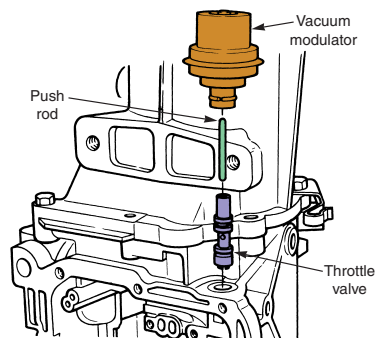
The vacuum modulator and throttle valve can be removed now to prevent damage. Do not lose the pushrod, if the modulator uses one. (Ford)
